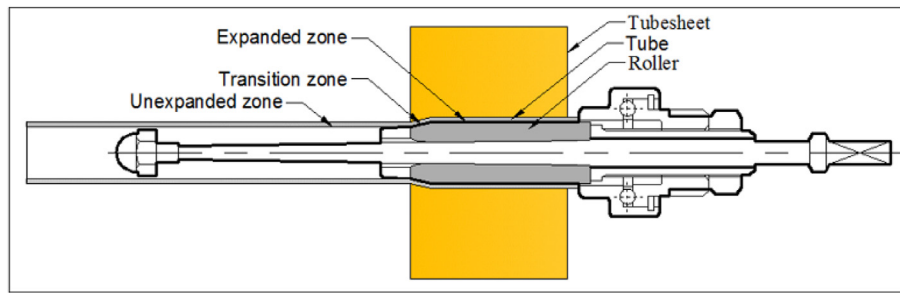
Schematic diagram showing the expanded zone, transition zone and unexpanded zone in the expanded tube using roller expansion process.
